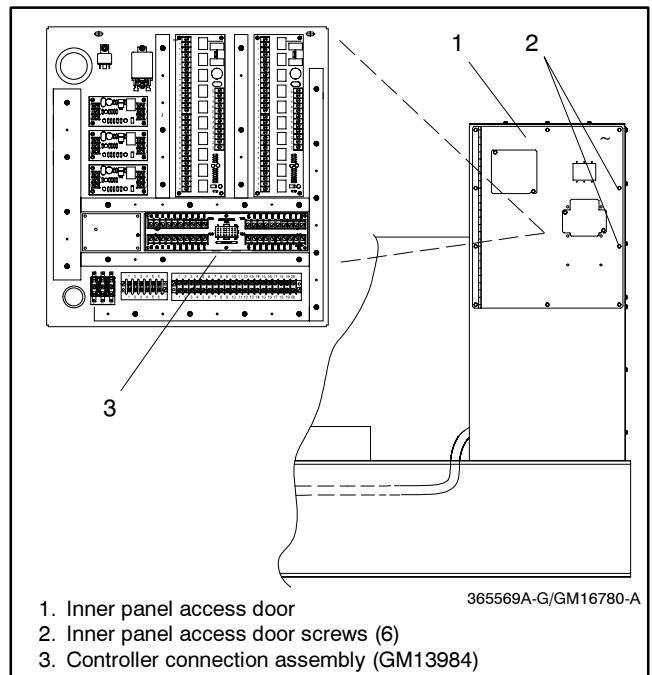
Terminal Block Bracket Mounting in Junction Box (450-2000 kW)
